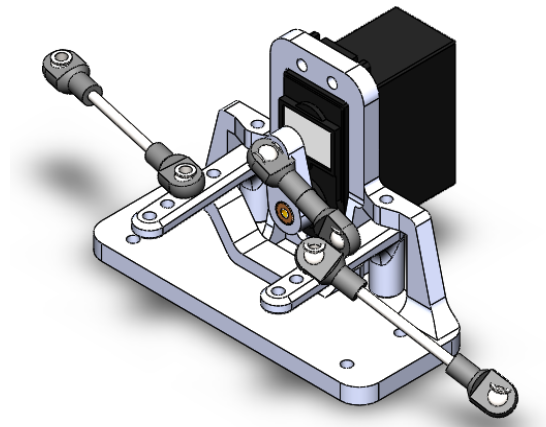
Final CAD Assembly for the 2019-2020 Steering Linkage (as Reproduced from Boggess et al.)
